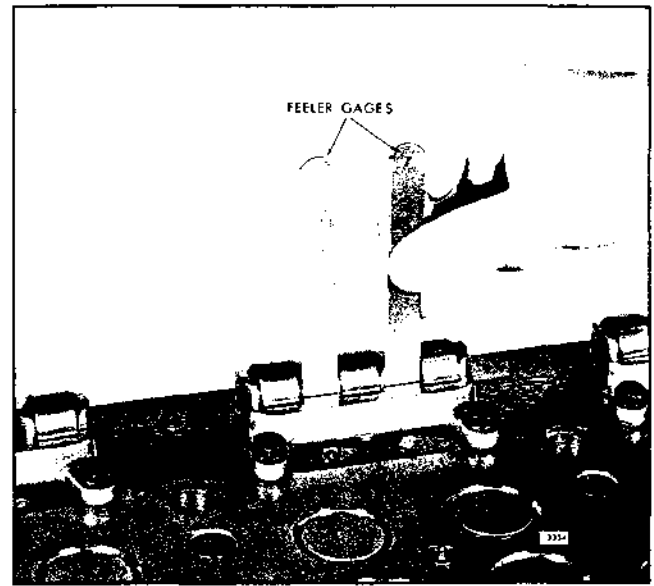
Checking the Clearance Between the Cam Follower Guide and Cam Follower Legs
